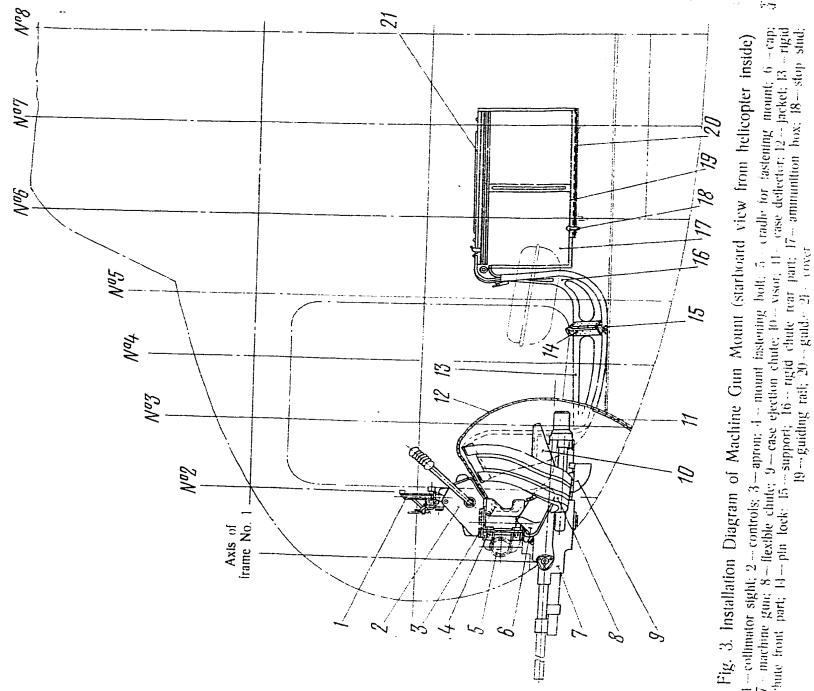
Installation Diagram of Machine Gun Mount (starboard view from helicopter inside)
